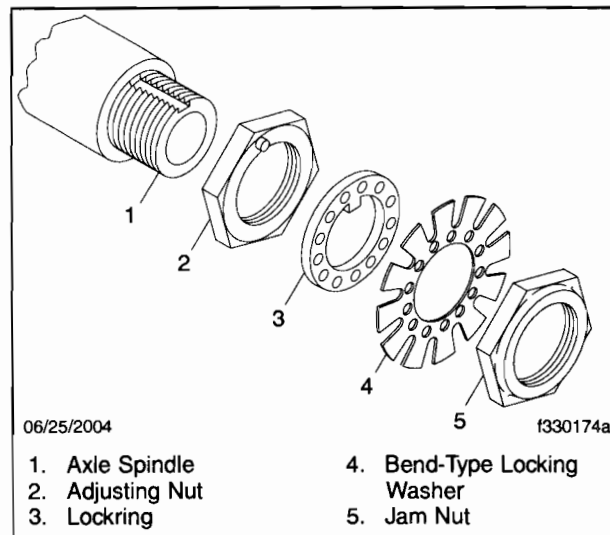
, Four-Piece Wheel-Bearing Retaining System
